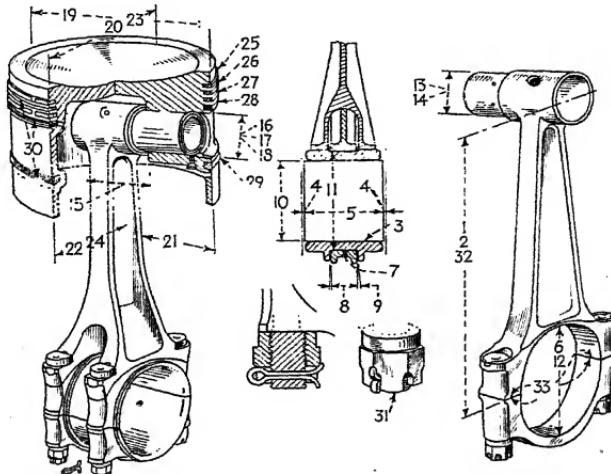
Pistons and connecting rods. See list of fits and clearances in Table 3.
